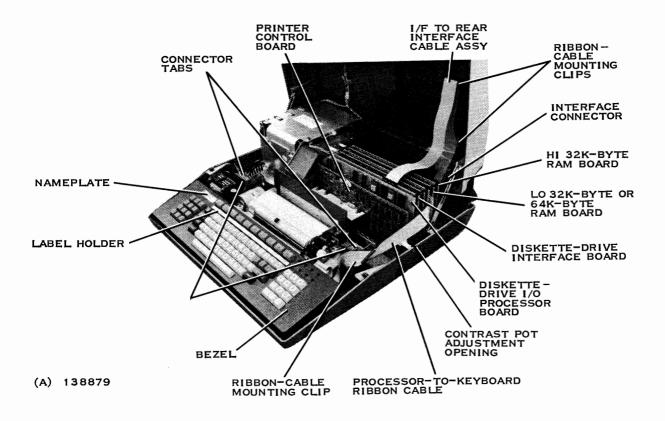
Internal View of DS990/1 Terminal Assembly
